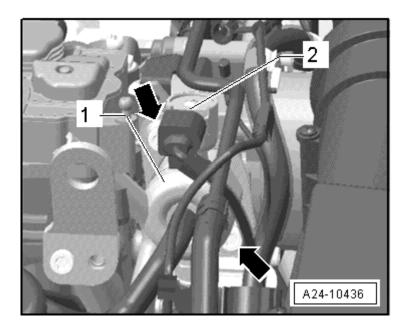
Fuel High Pressure Pump & Fuel Pressure Regulator Valve Electrical Harness Connector
